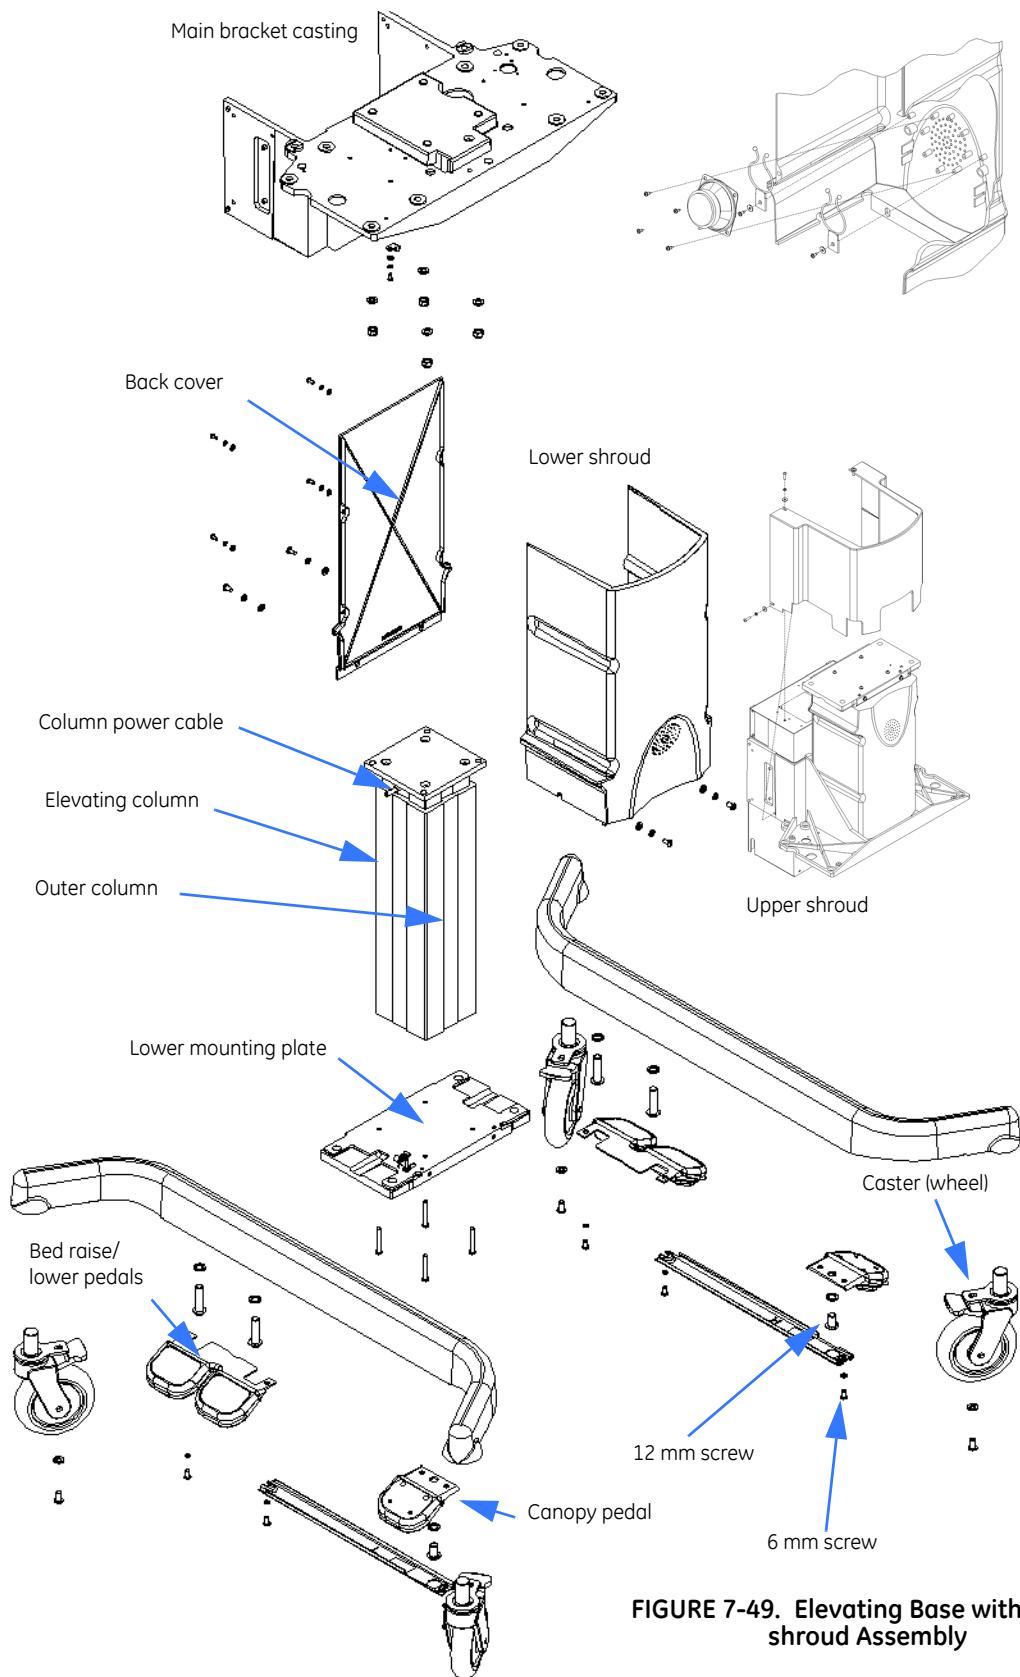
Elevating Base with Three-shroud Assembly
